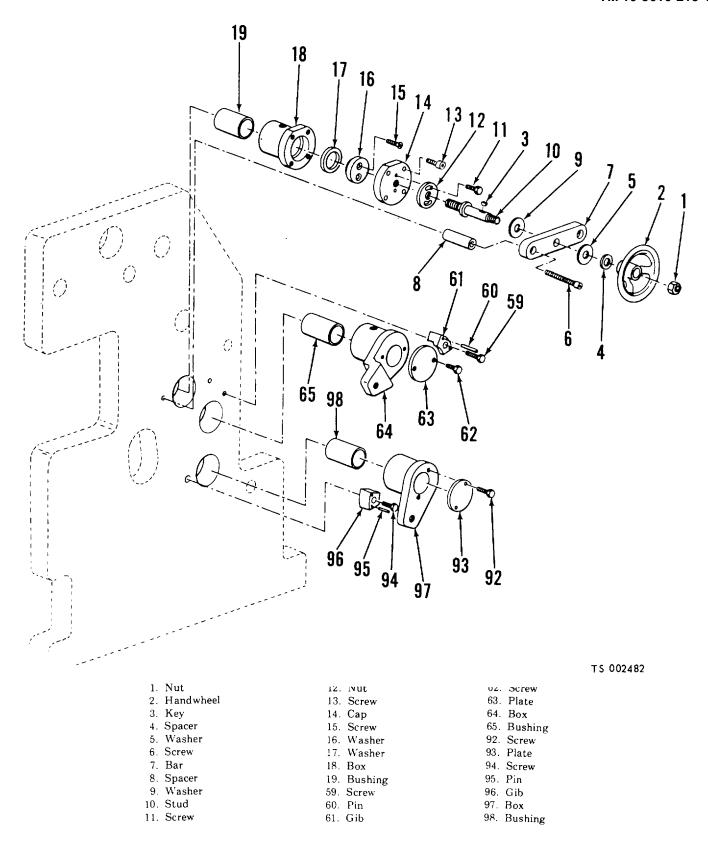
Cylinder and main drive assembly (Sheet 1 of 5).
